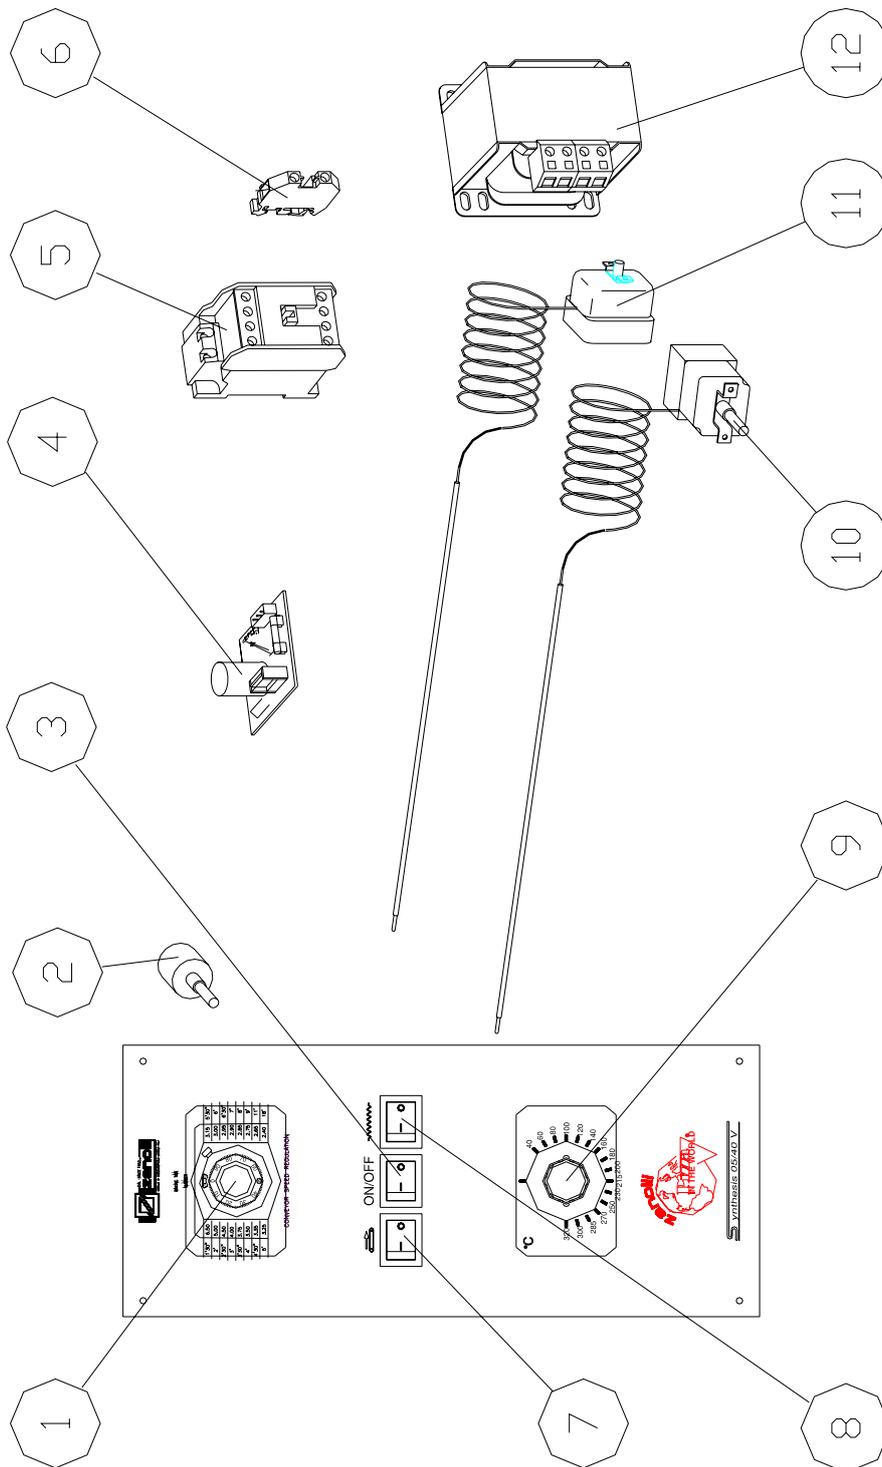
Electrical parts exploded view 05/40 V Power version electromechanical
